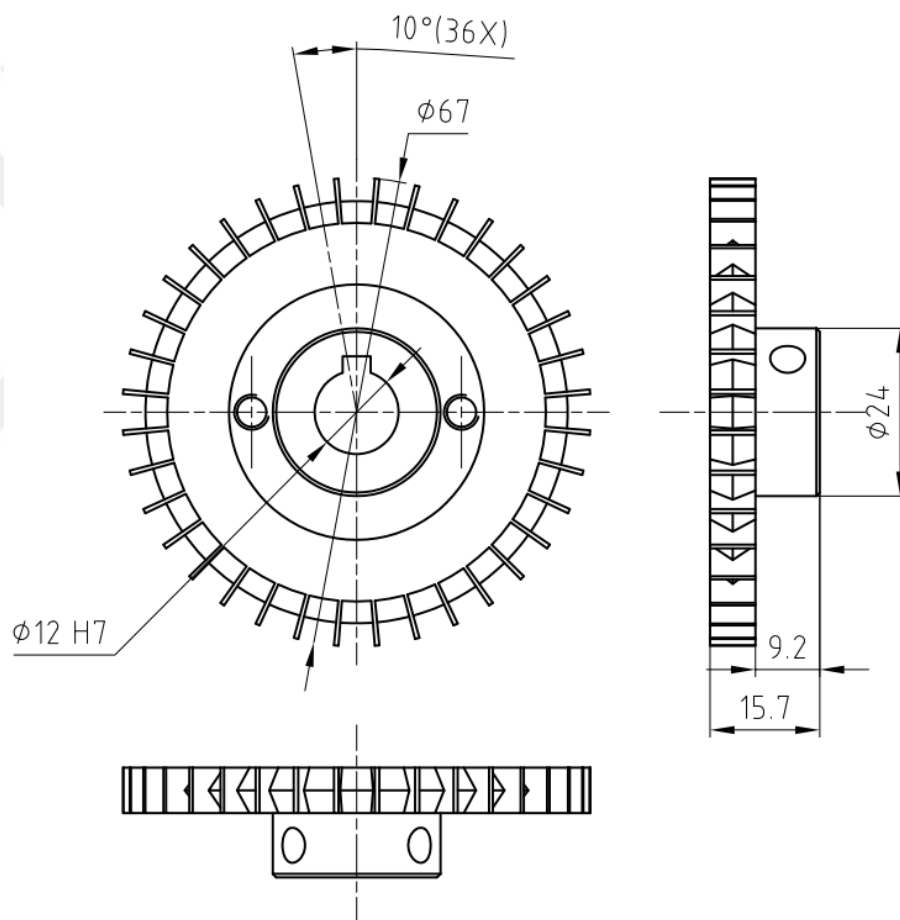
Technical drawing of impeller system- MOMB-DAF-2
